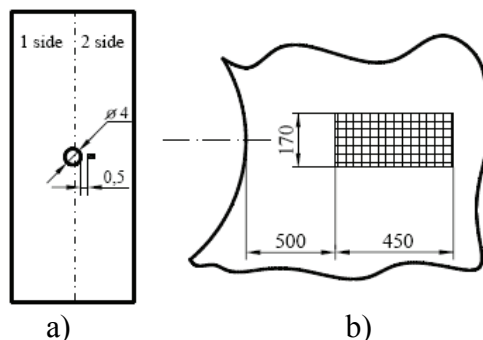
Specimen sketch : a) general specimen sketch (dimensions, mm); b) area of specimen where surface relief was measured (dimensions, μm)
